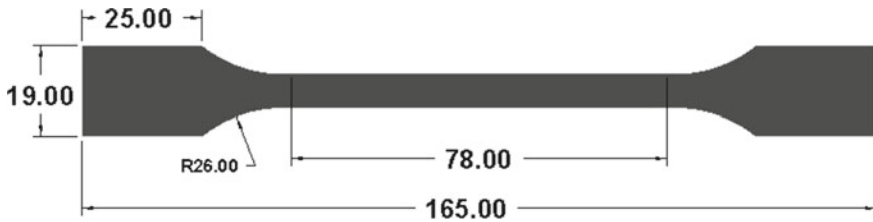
2D CAD model of the tensile test specimen (all dimensions are in mm)
